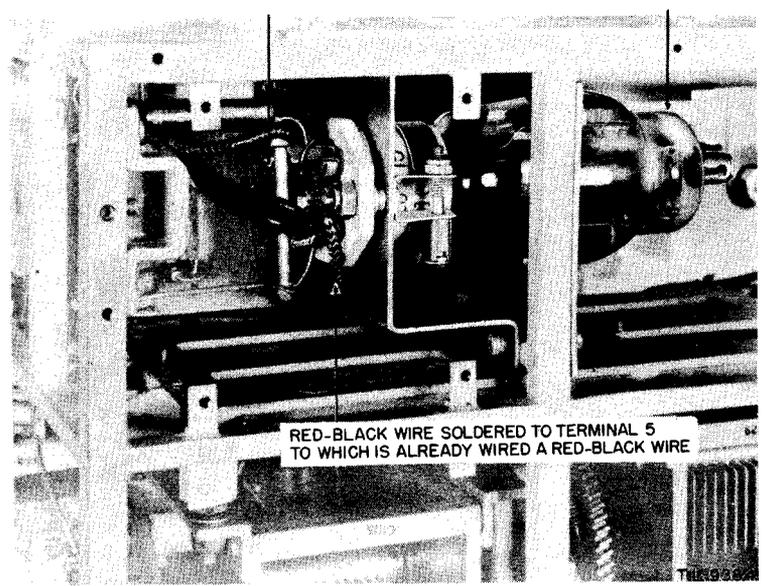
Closeup view, showing resistor R165A and new i-p-a socket wiring.
